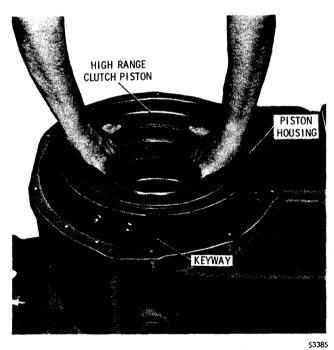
Installing forward-and-high range clutch piston housing (pistons in place)
